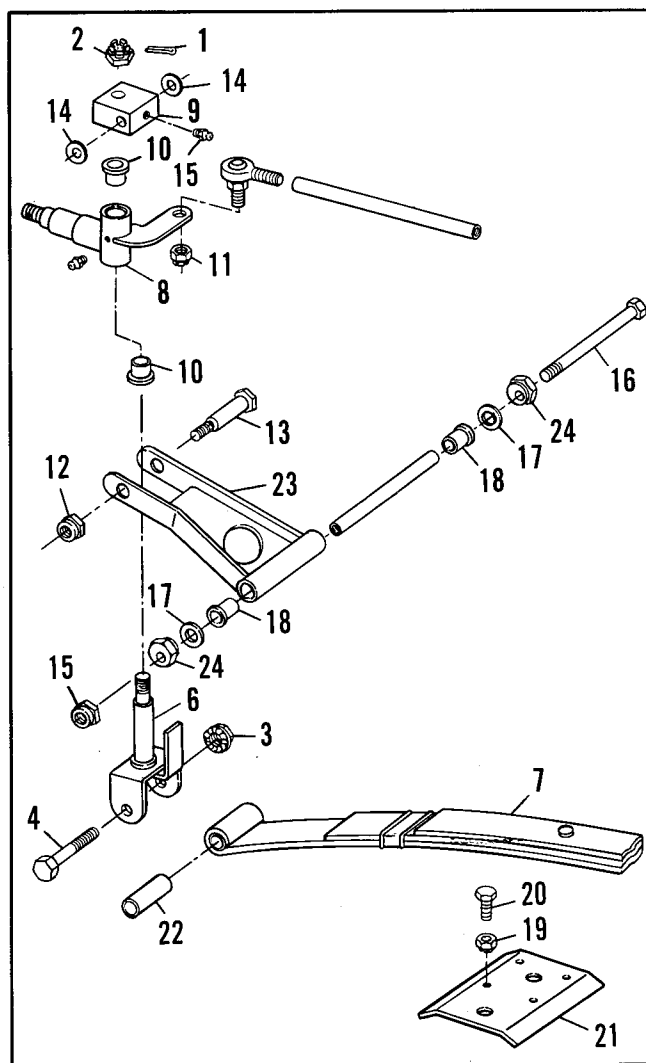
Leaf Spring, King Pin, Steering Arm and A-Frame Removal
